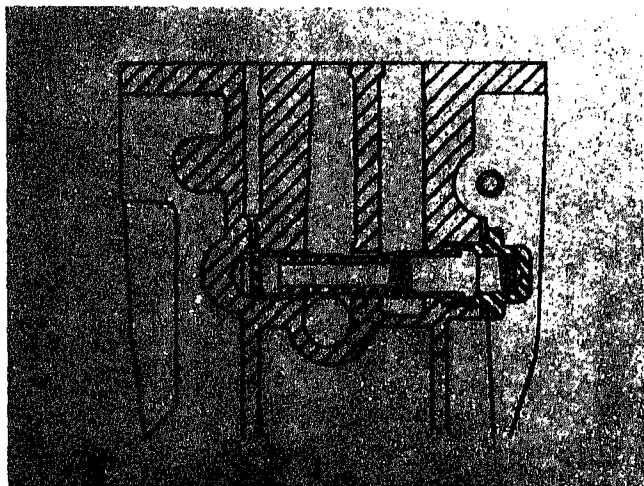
Lubricating oil pressure regulator by-pass — cold-start position
